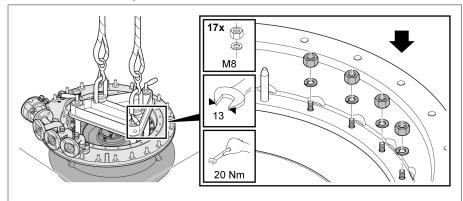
Screwing the top part of the on-load tap-changer head to the bottom part
